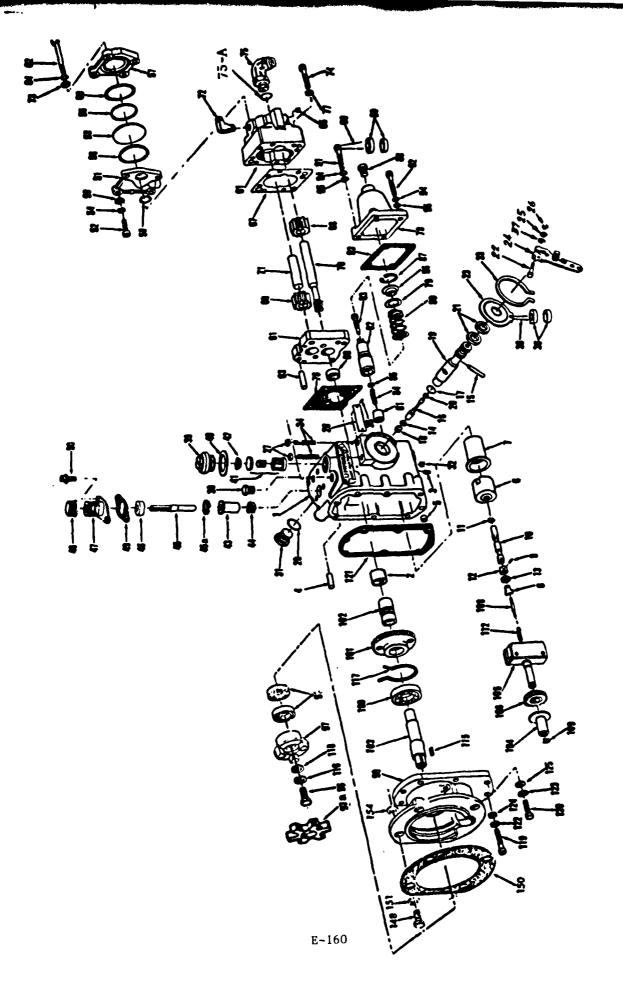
, THE CUMMINS PTG TYPE FUEL PUMP ASSEMBLY AS ON THE CUMMINS BUILT ENGINES SOURCE: CUMMINS ENGINE COMPANY
